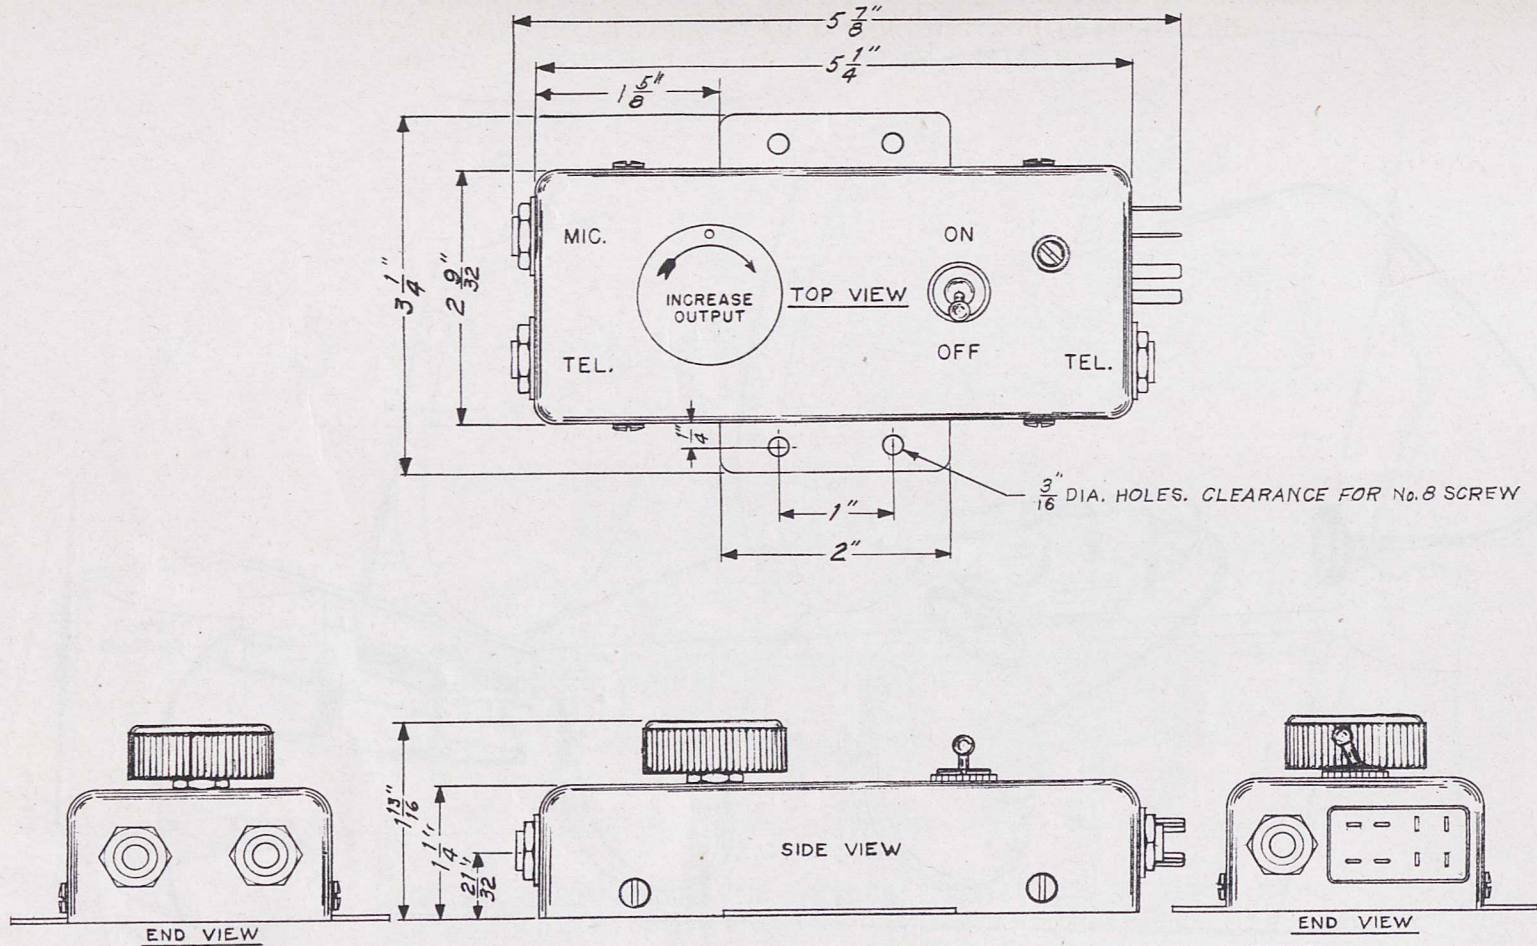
RADIO CONTROL BOX BC-722-A OUTLINE DIMENSIONAL DETAIL
